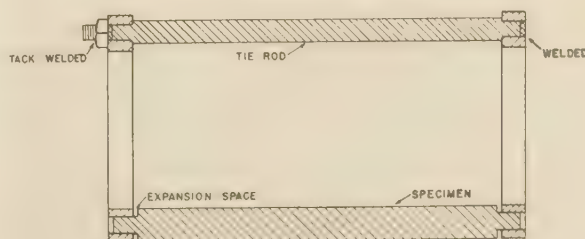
CAGE ASSEMBLY, SECTION A-A
